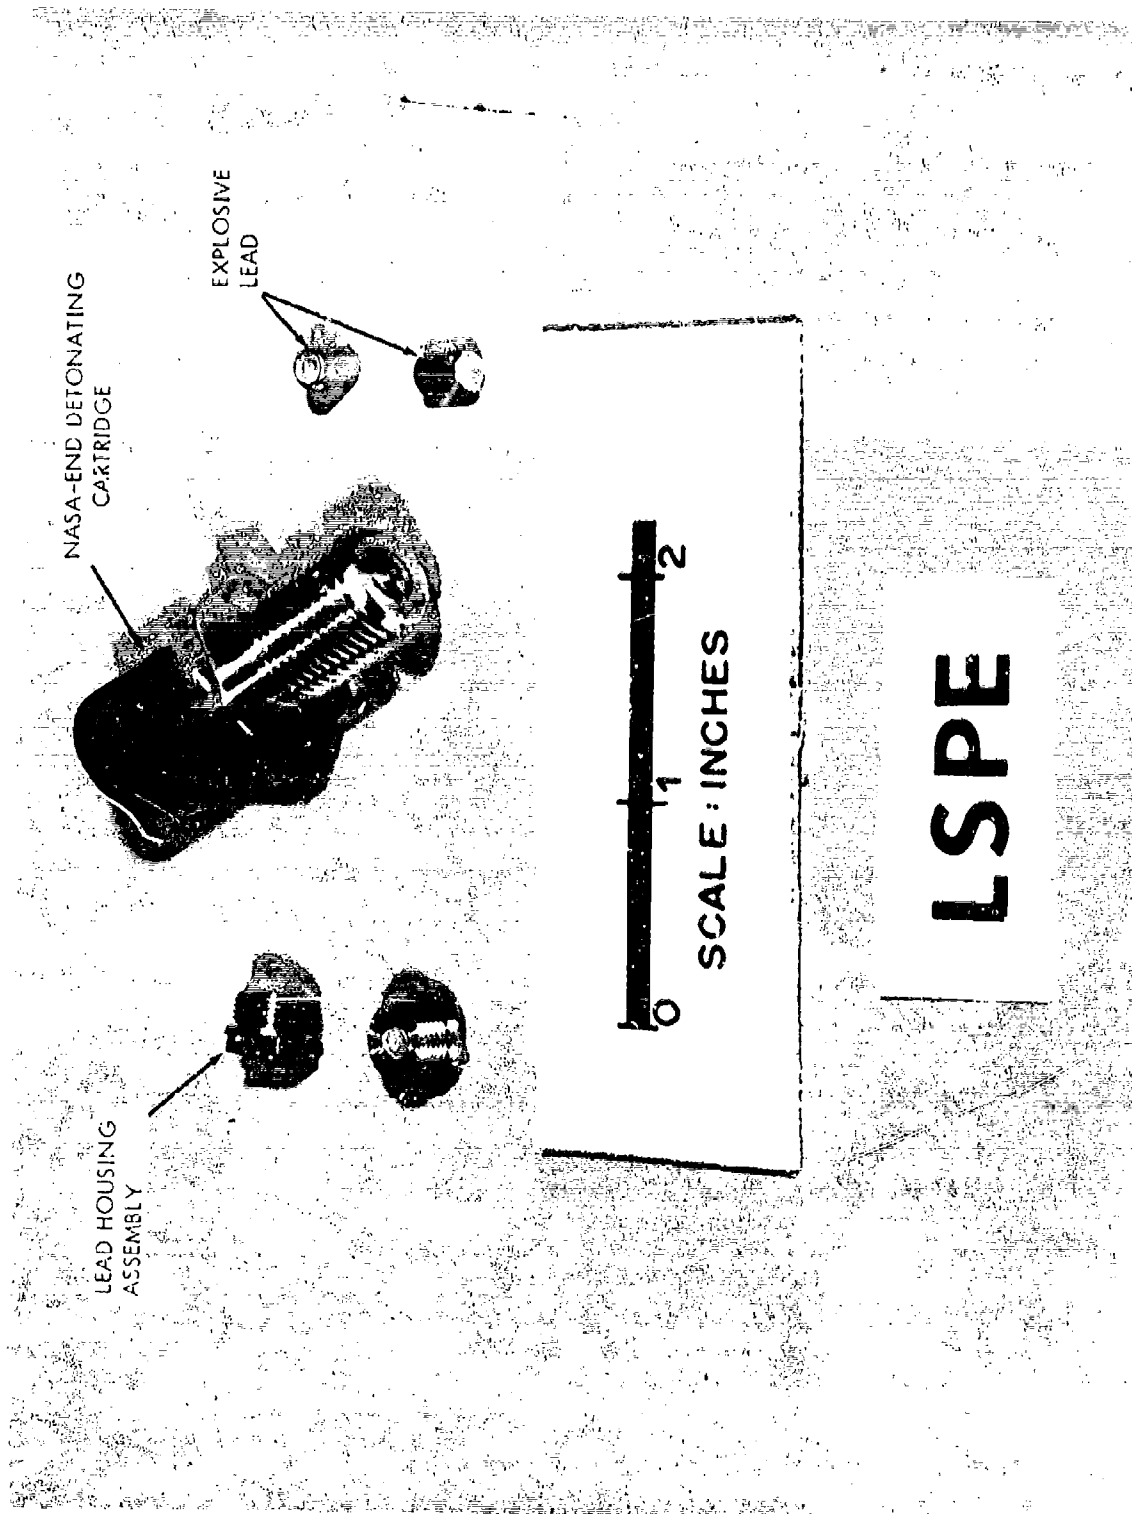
PHOTOGRAPH OF THE ACTUAL EXPLOSIVE LEAD, LEAD HOUSING ASSEMBLY, AND THE EDC DETONATOR
